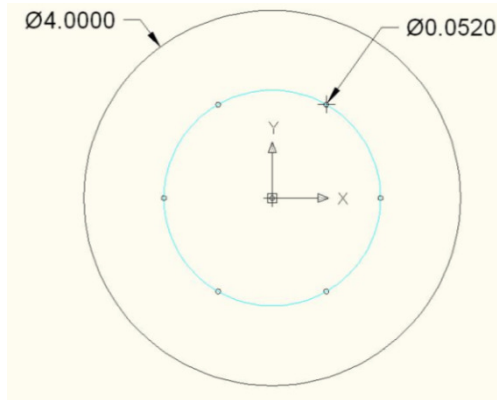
CAD drawing of distributor plate used for Glass Spheres. $N_{or} = 7$. Dimensions in inches
